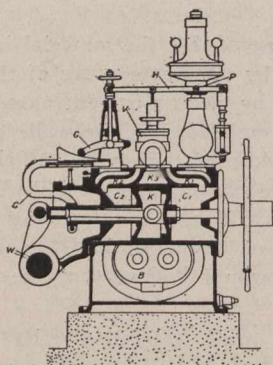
Oil Regulator in the Bell Water Turbine.
